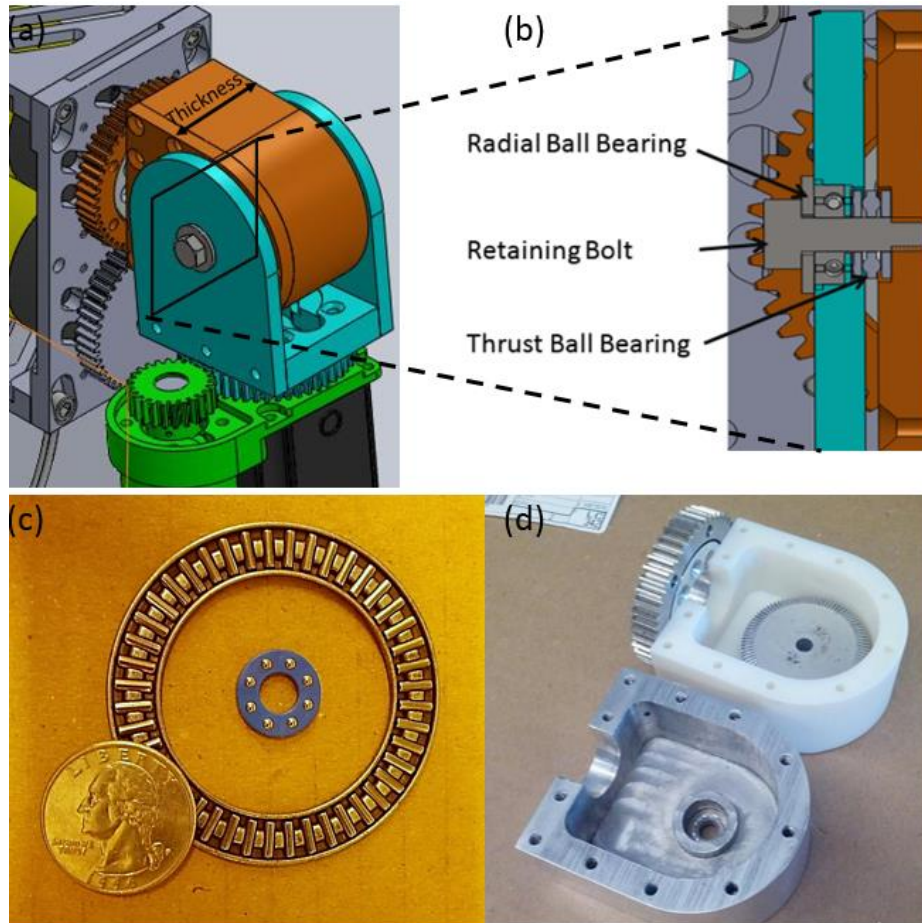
(a) Design constraints related to shoulder thickness. (b) Radial and thrust bearing between shoulder shell and outer arm plate. (c) Difference in size between needle thrust bearing and initial ball thrust bearing. (d) Rapid prototype of new shoulder design to check for tolerances before producing final version.
